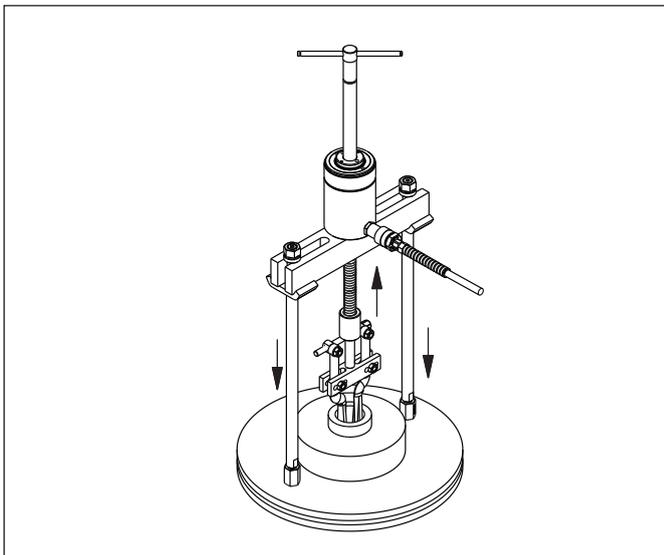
, Cross Bearing Puller with Bearing Cup Attachment (typical)
